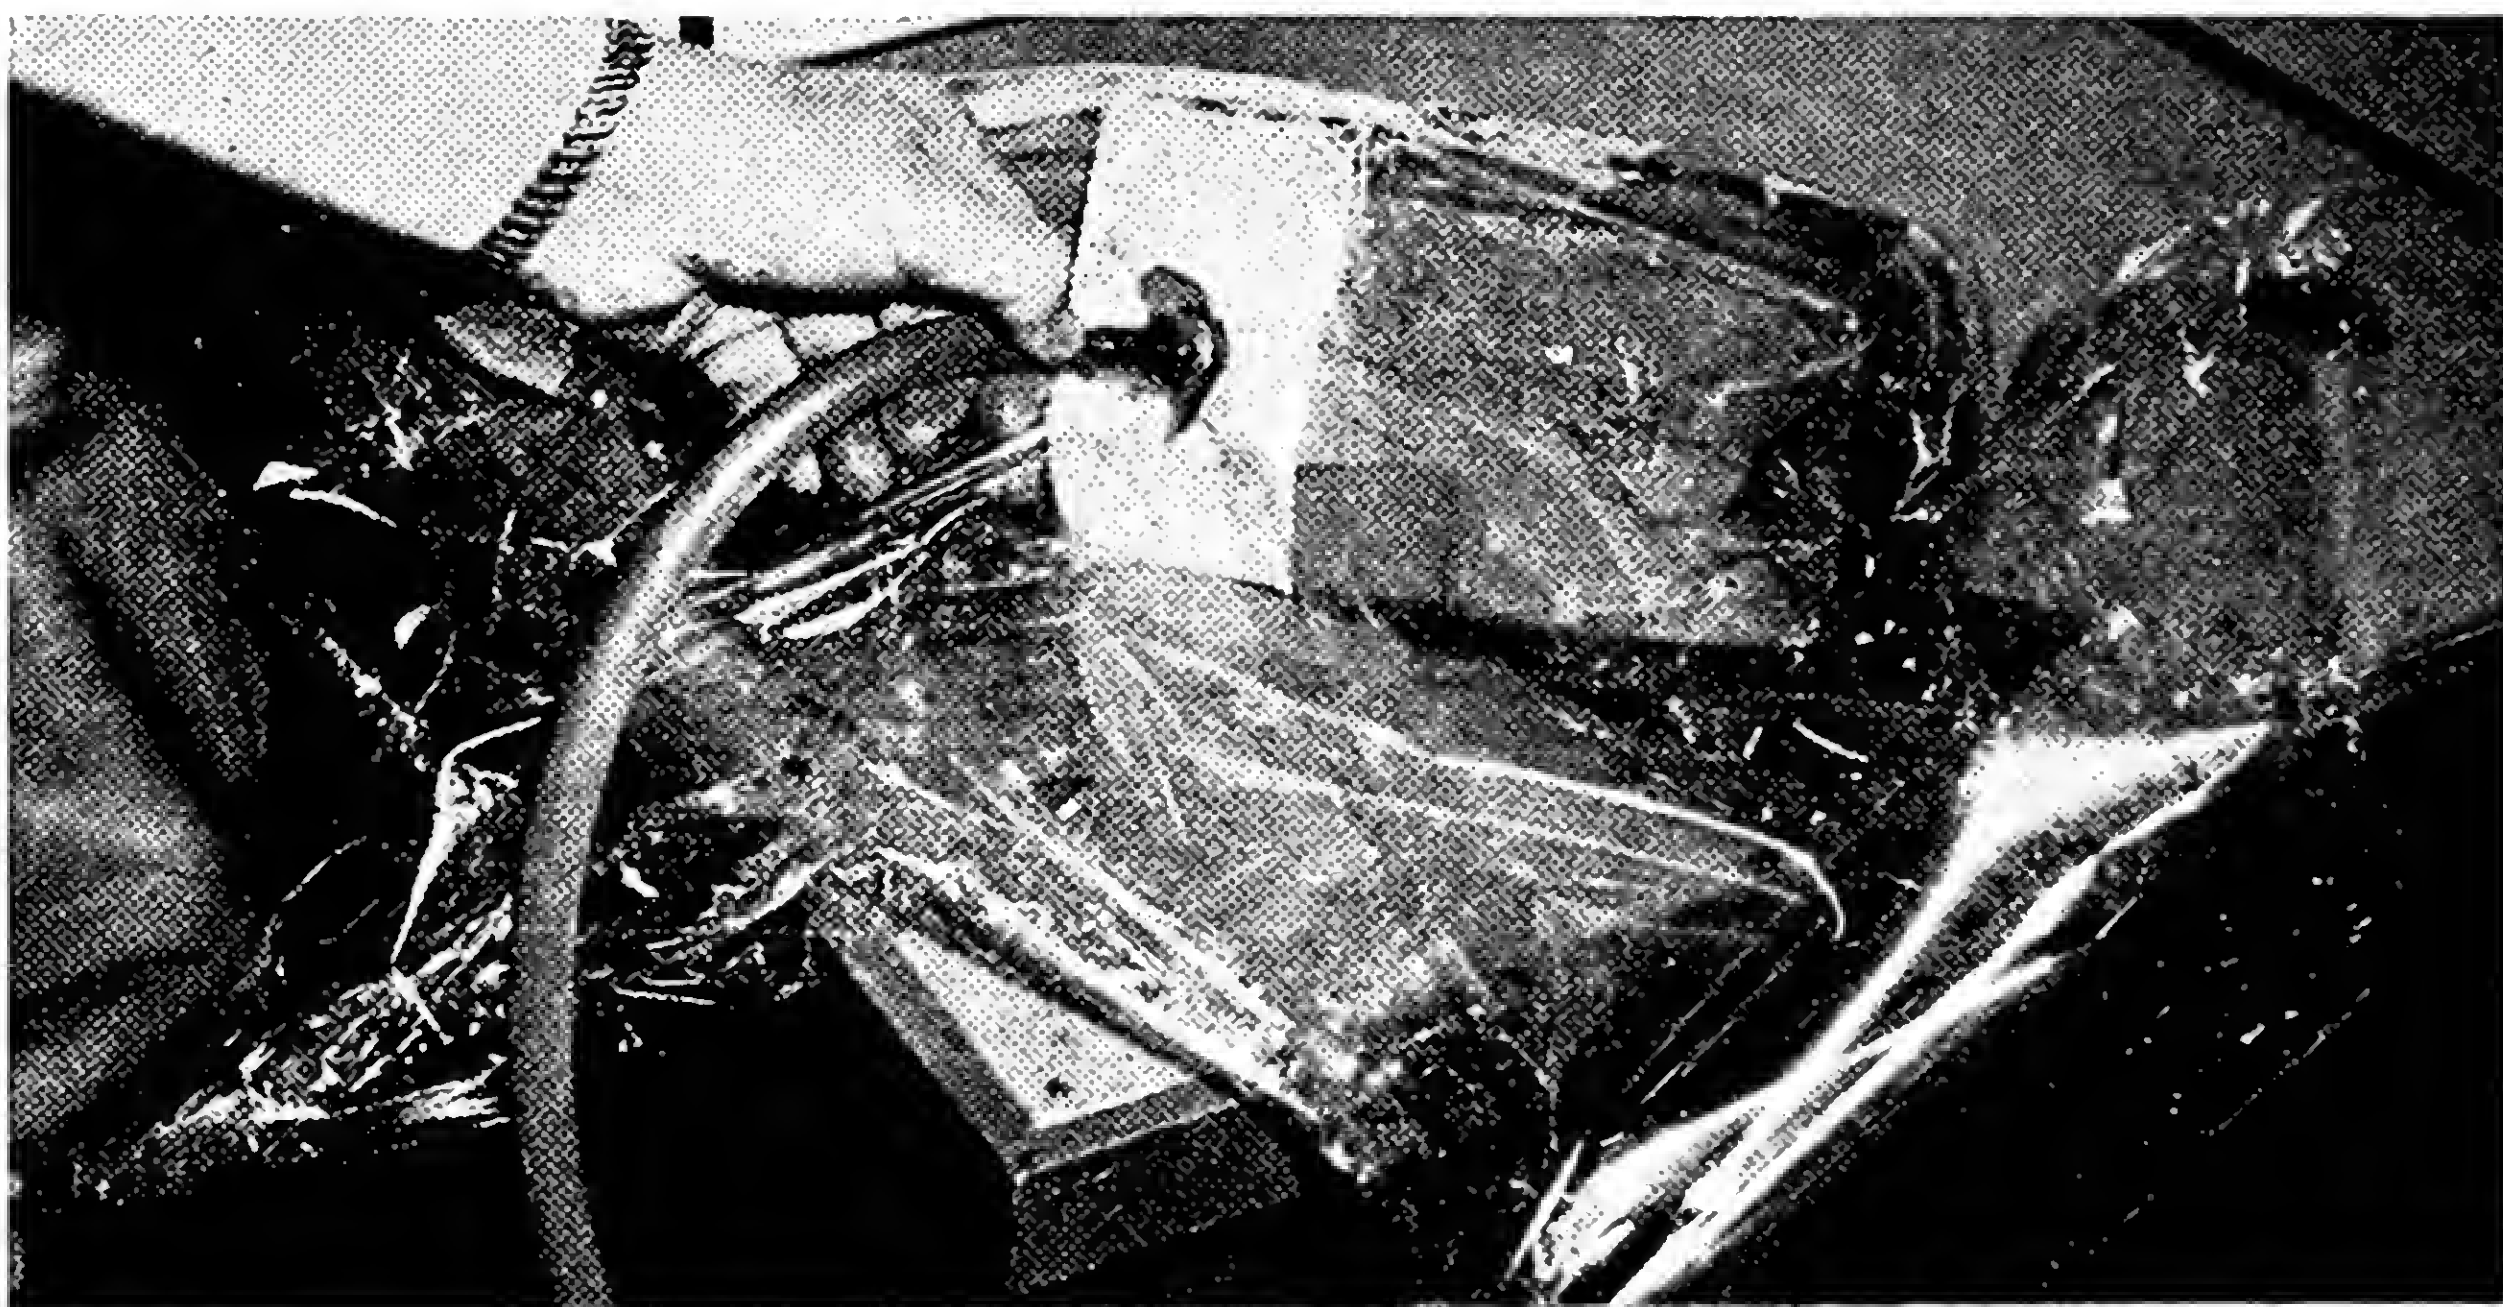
Drawing a vacuum on the sealed PVA bag. (See Figure 91.)
